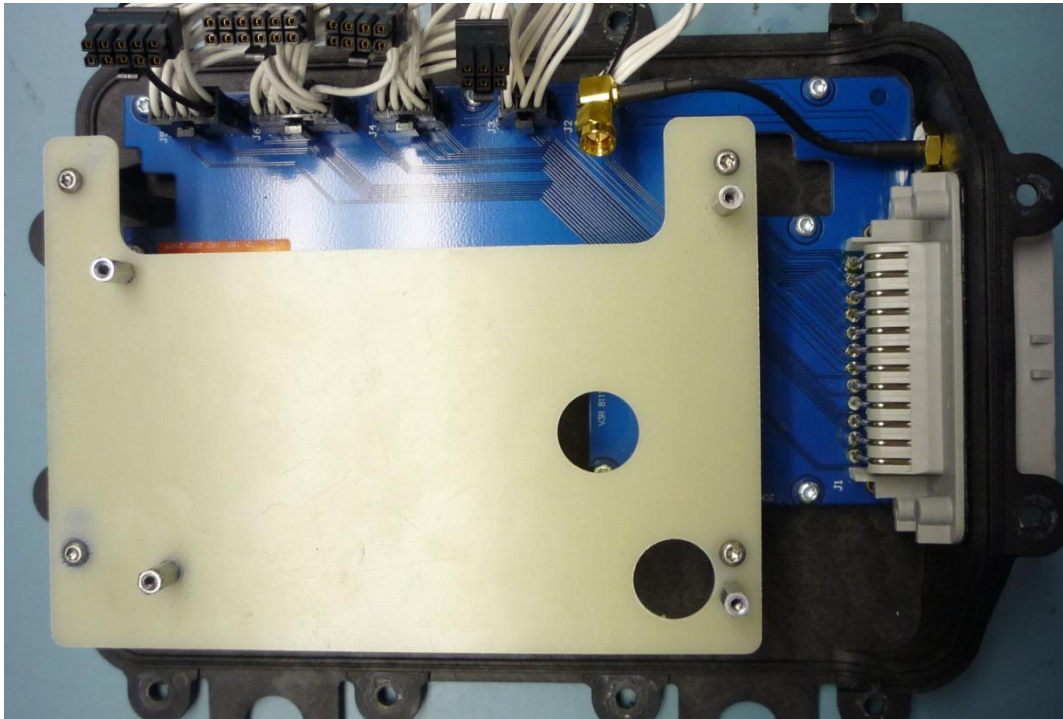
V3R Lower enclosure and pass-through PCB with adapter plate installed
